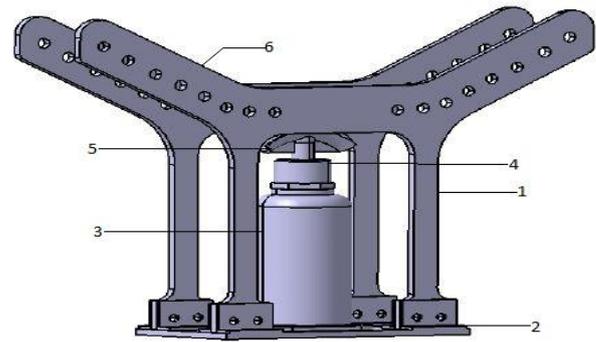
Hydraulic Pipe Bending Machine [5]
